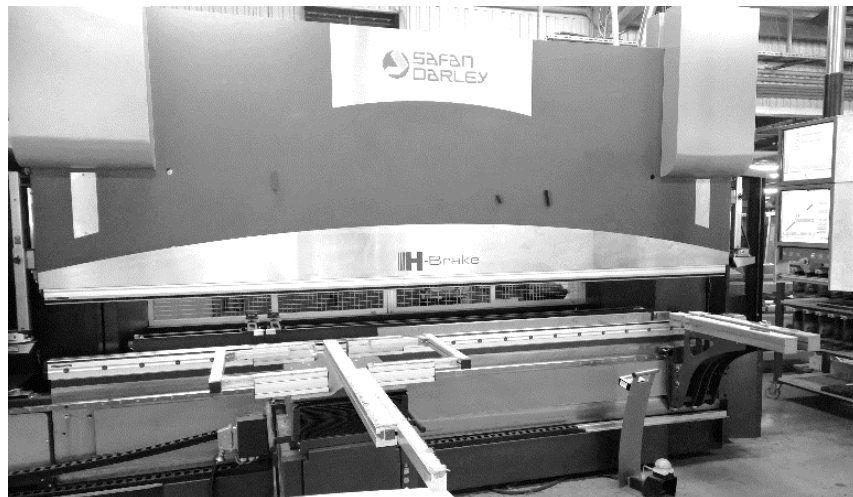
A Safan Darley's press brake machine, used in the target company
